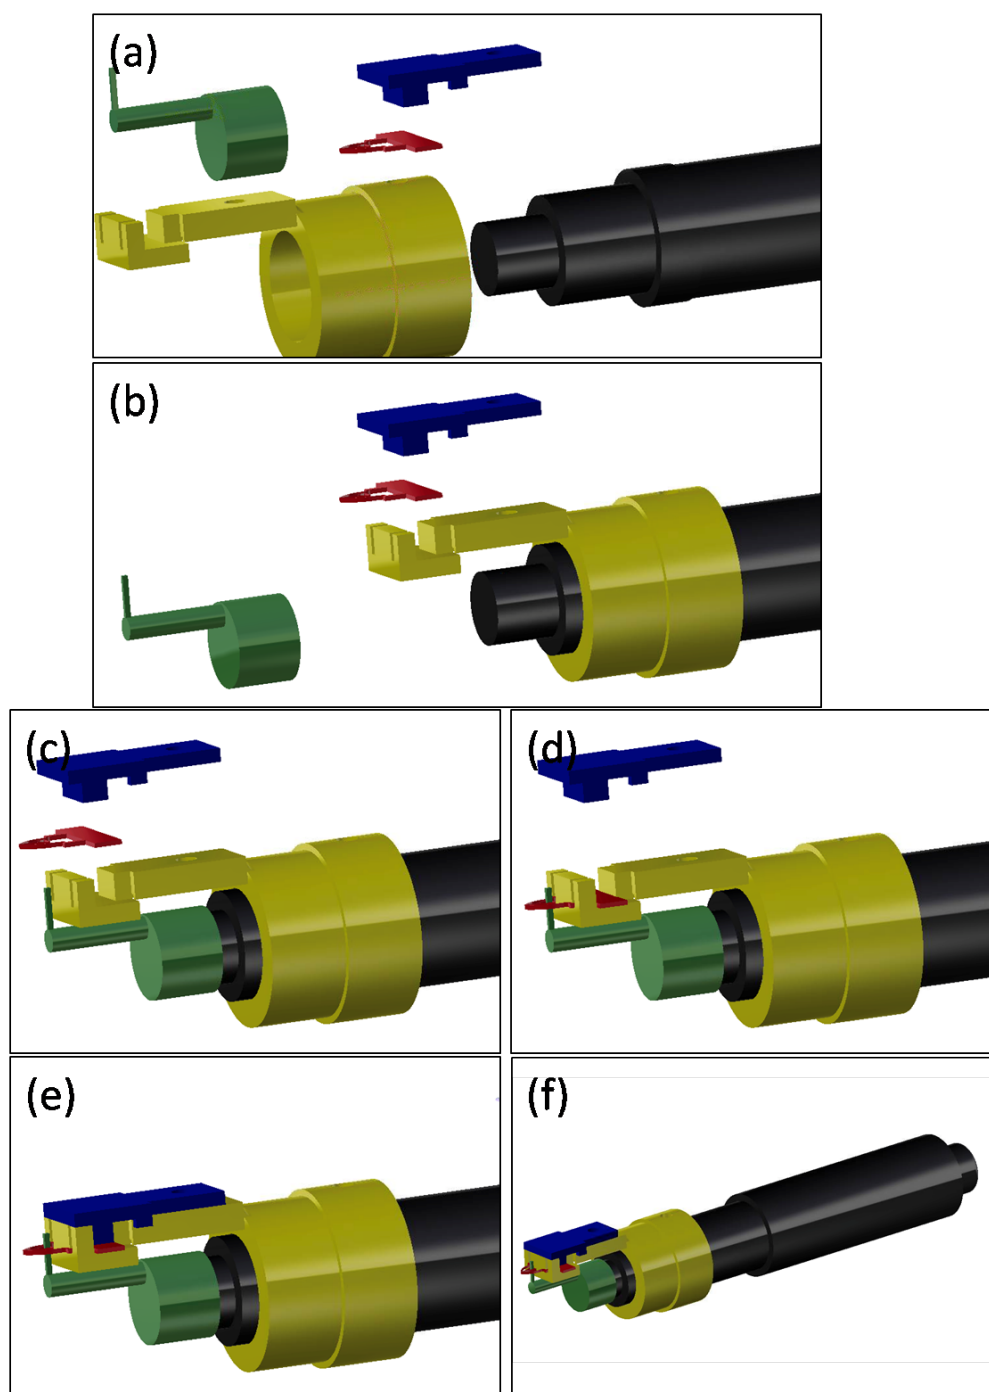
Schematics of the assembly process. (a) An explosion view of the micromanipulator, (b) assembling micrometer head with the tweezers holder, (c) assembling the cone tip, (d) installing the microtweezer, (e) assembling the clamping cap, (f) a zoom-out view of the micromanipulator.
